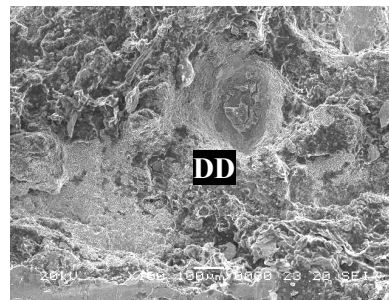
Fracture Morphology of PWHT specimen in the weld metal region seen with Deep Dimples (DD)
